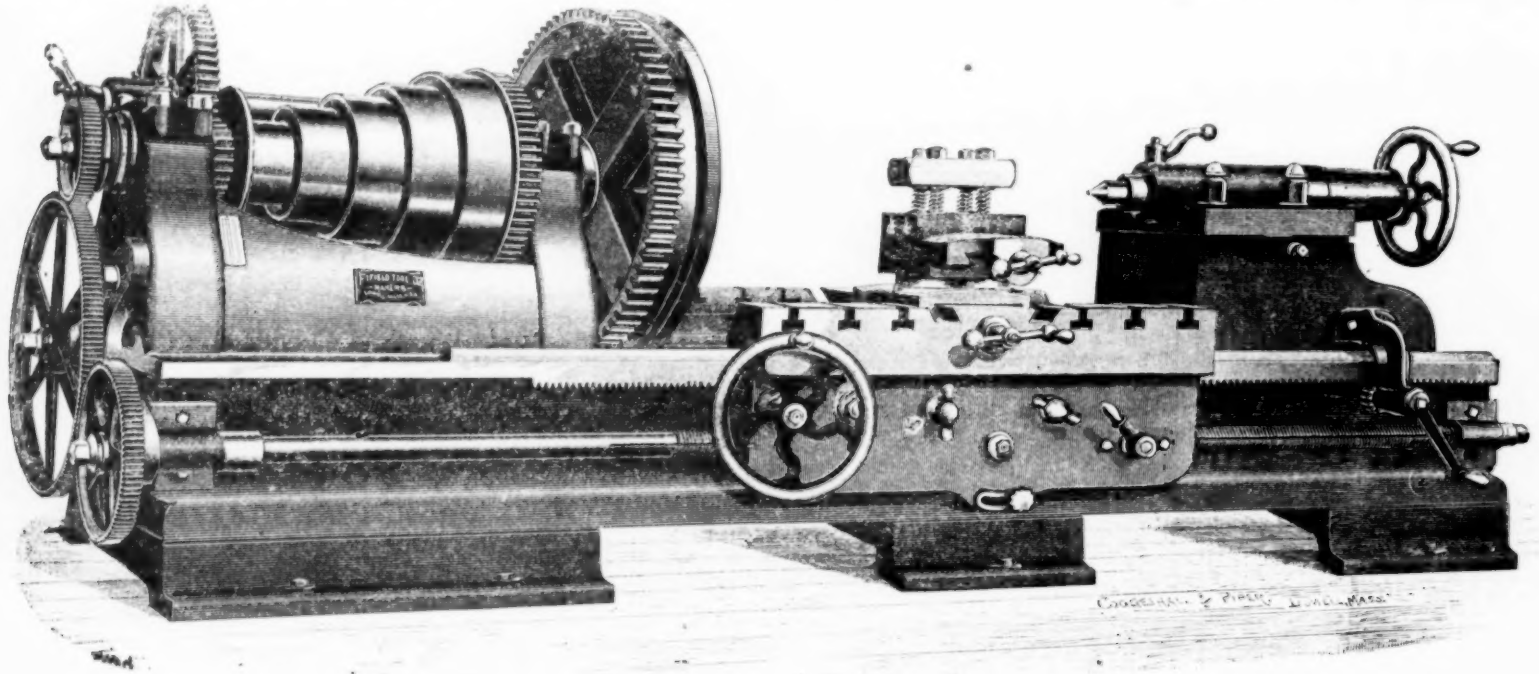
NEW 40-INCH GEARED ENGINE LATHE.
